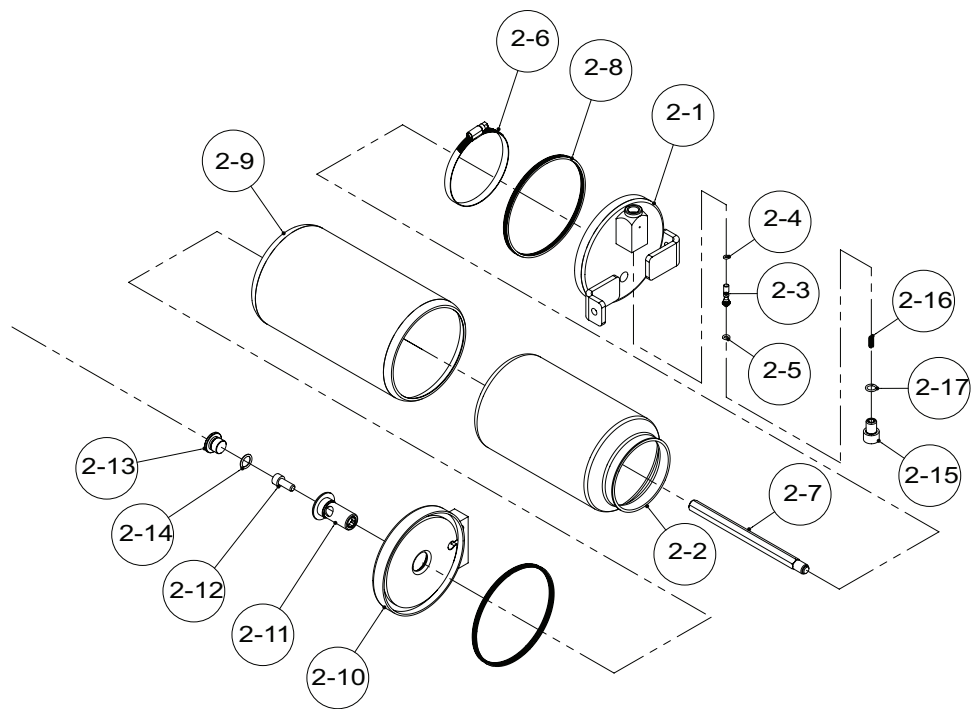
Replacement Parts Illustration for Model 23401 Oil Tank
